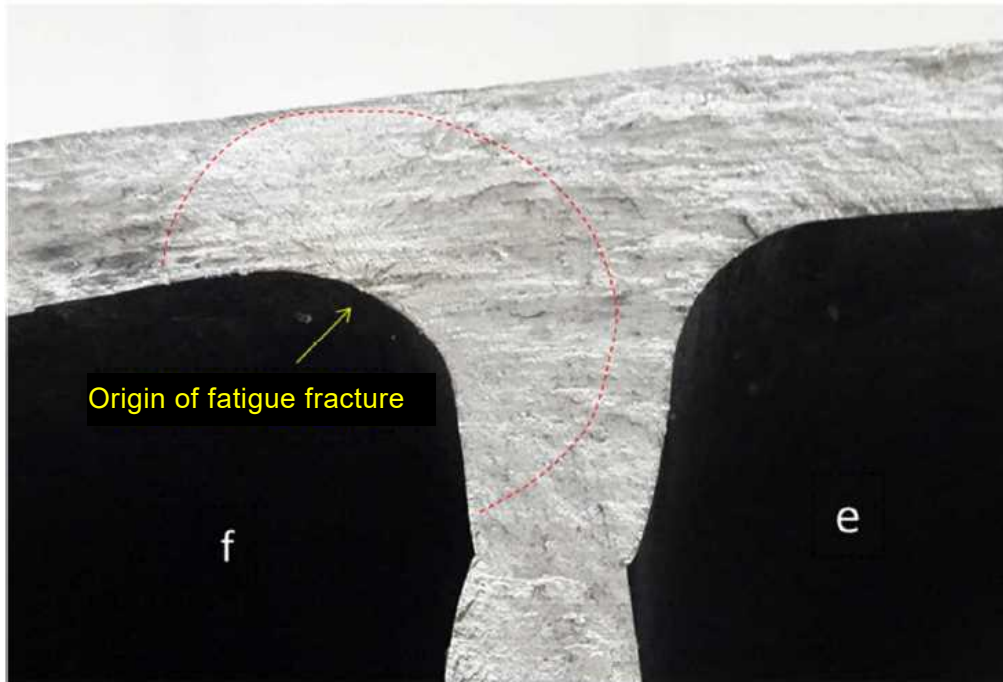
Closeup photo of the fracture surface of blade No. 16
